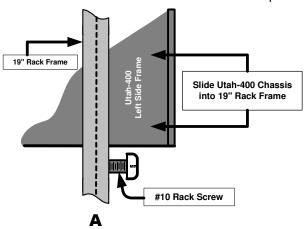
Sliding the Utah-400 Chassis into Rack Frame
